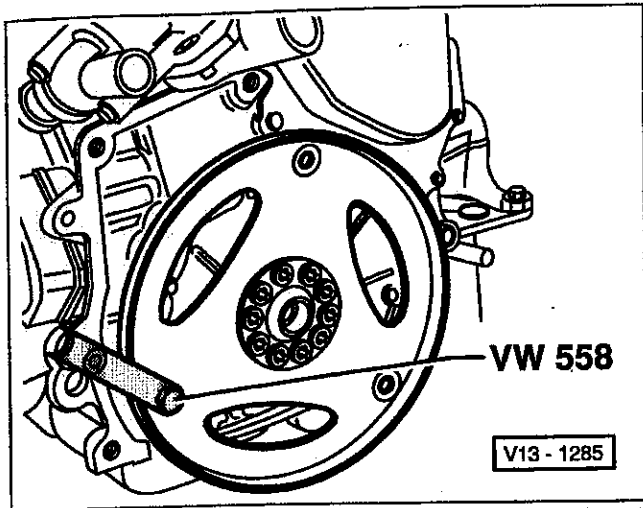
Driveplate secured with holding fixture VW 558. Flywheel is similar.
